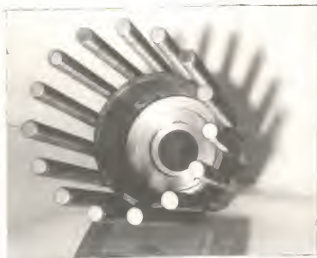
The forming die to which a cover pipe has been welded. Fifteen threaded rods were welded to the cover pipe for fastening the cover plate.
